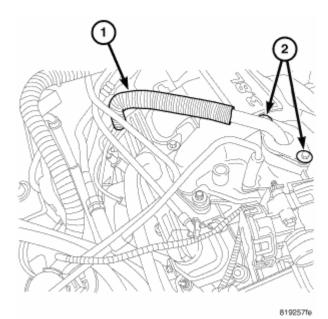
EGR Tube Flange Courtesy of CHRYSLER LLC
